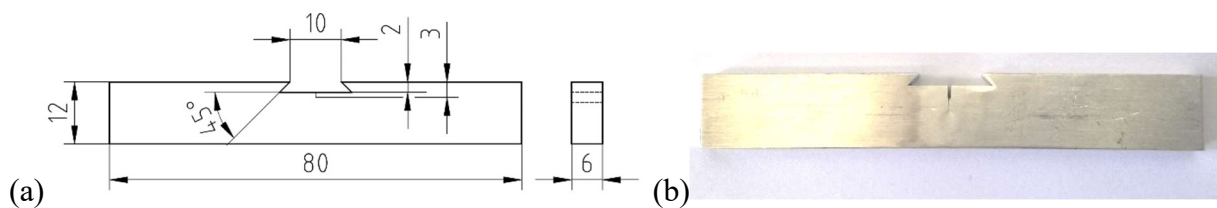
Geometry of the SENB specimen (a) and SENB specimen with fatigue precrack (b)
